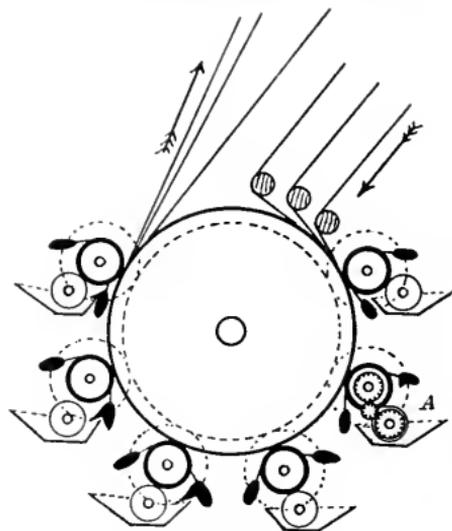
Diagrammatic section of a six-colour roller machine.
